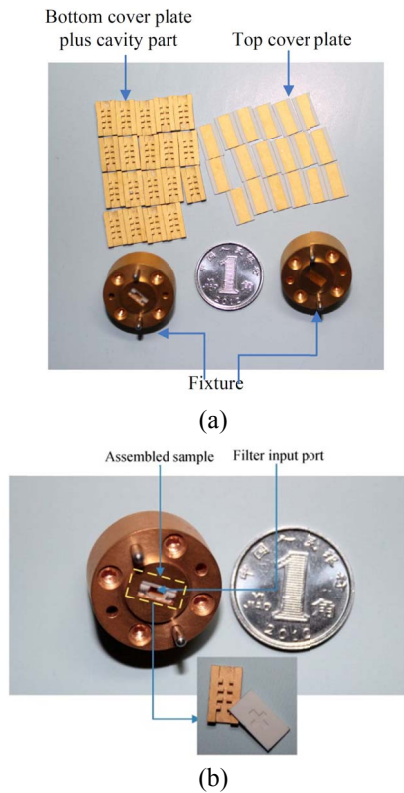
(a) The fabricated sample and two fixtures made of copper and plated with gold inside; (b) the fixture with a sample assembled inside.
